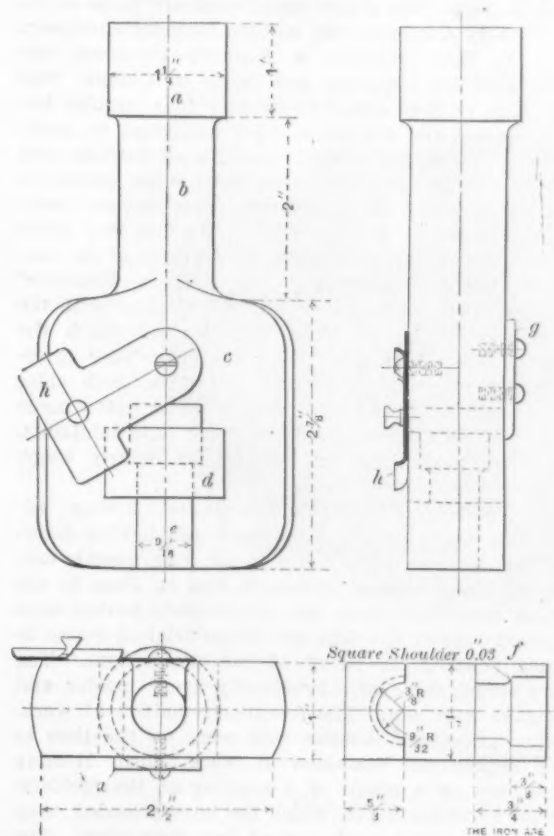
Plan, Front and Side Elevations of the Chuck and Plan and Side Elevation of the Bushing.
